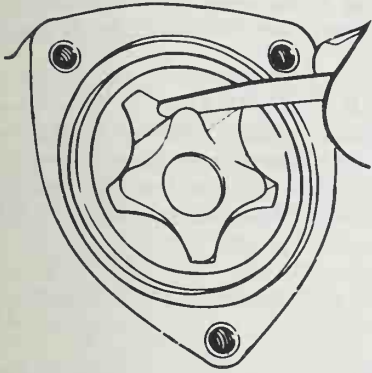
Inner rotor to outer rotor clearance should not exceed 0.2 mm. Measure as shown.
